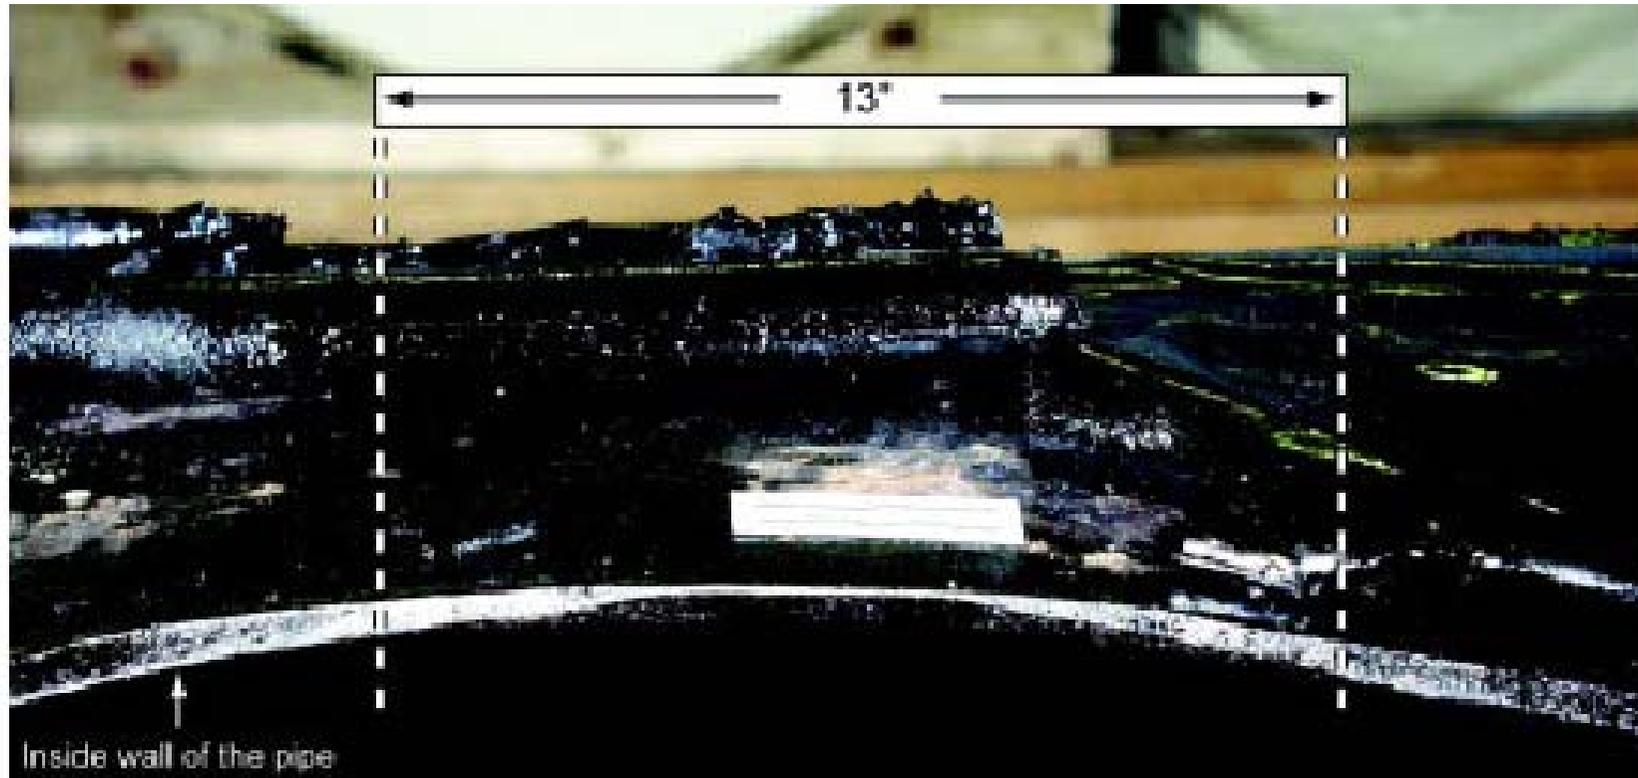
View of top fracture surface of 13-inch-long crack, showing penetration nearly through pipe wall in center.
